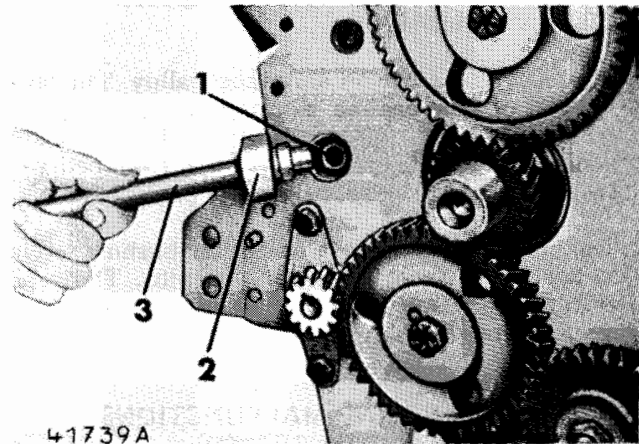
Driving in Valve Seat Bushing of Oil Pressure Regulating Valve
